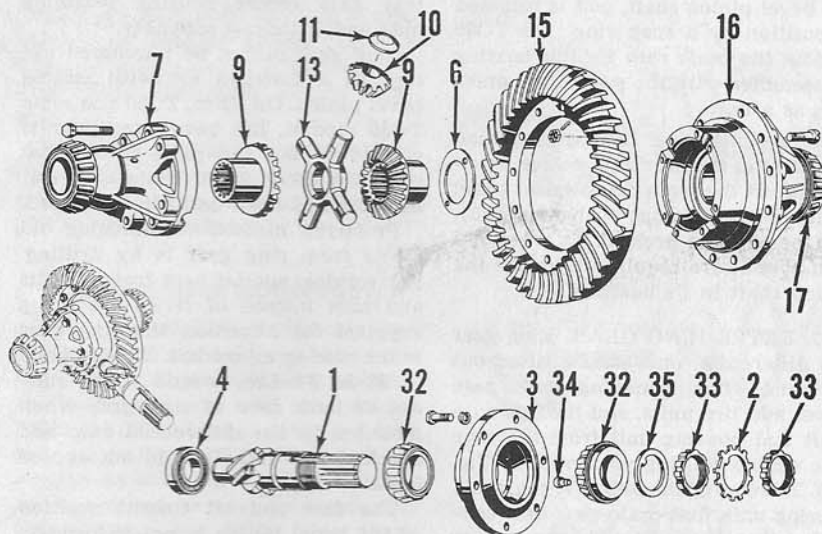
TO30 differential, main drive bevel pinion and ring gear and components. Special heat-treated bolts for attaching the bevel ring gear to the differential case instead of rivets are being supplied for service. TE20 and TO20 are similar.
